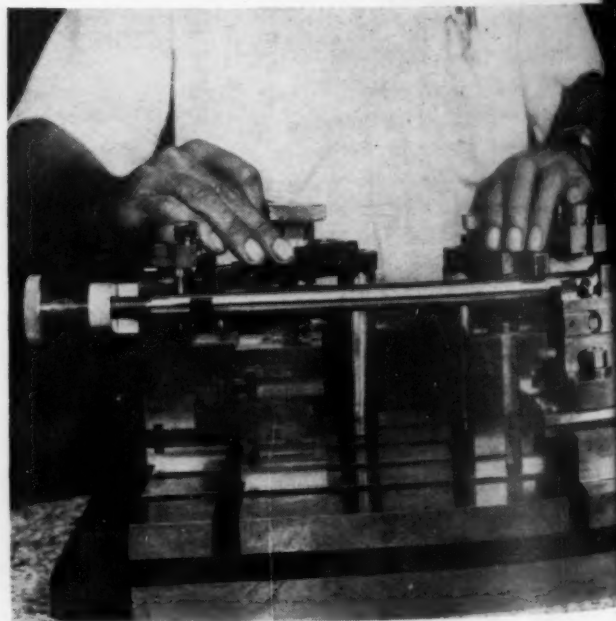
Close-up of the fixture in Fig 2 shows it being assembled by toolmaker. Note buildup of one element on another.
